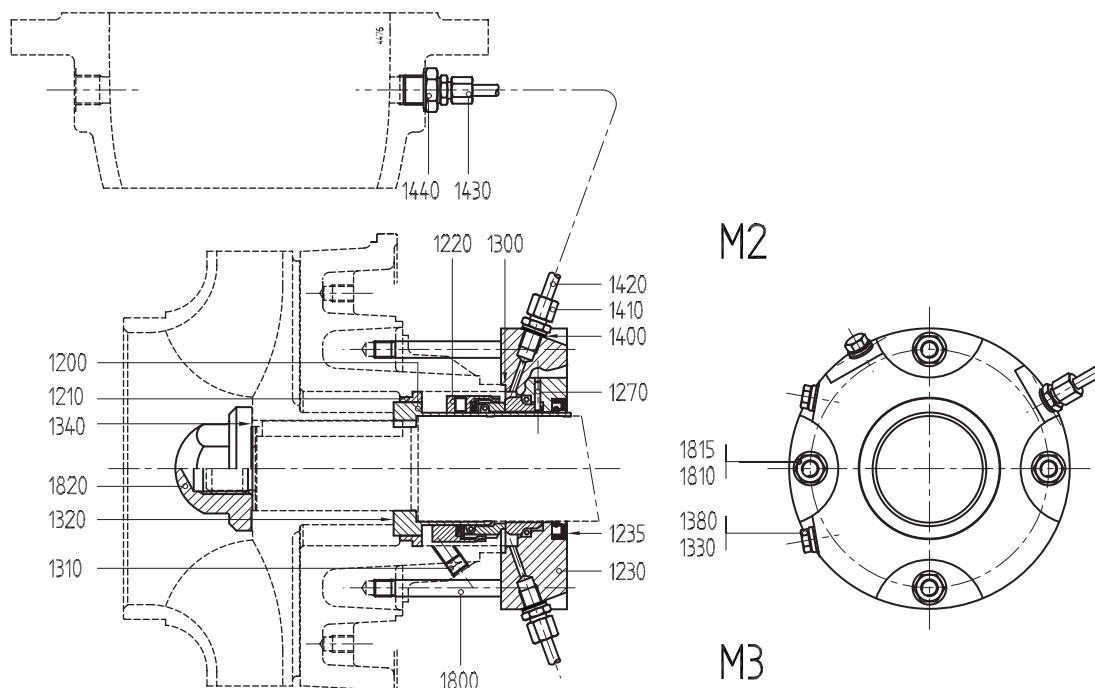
Mechanical seal M2-M3 - bearing group 4.
